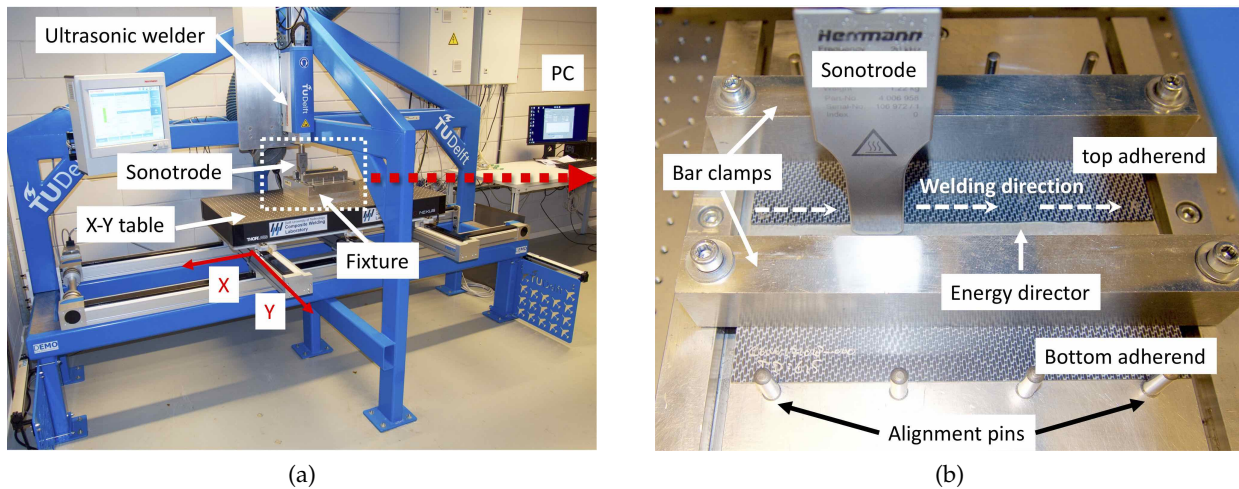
(a) Overview of the continuous ultrasonic welding machine. (b) A closer view of the welding setup and clamping.
